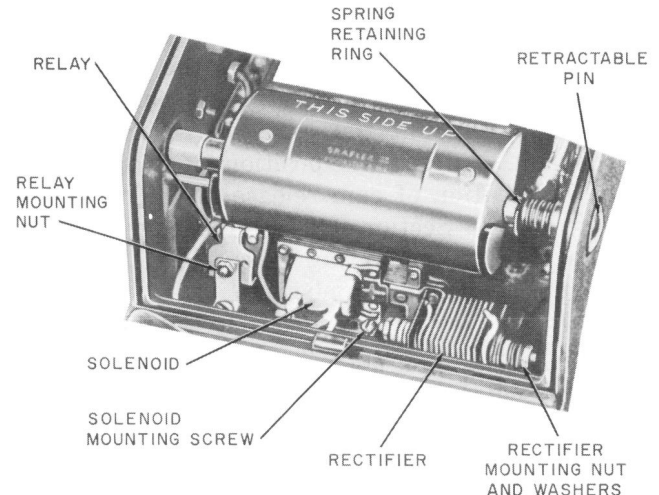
KS-14593 L2 Message Register Camera — Partial View Showing Relay, Solenoid, and Rectifier
